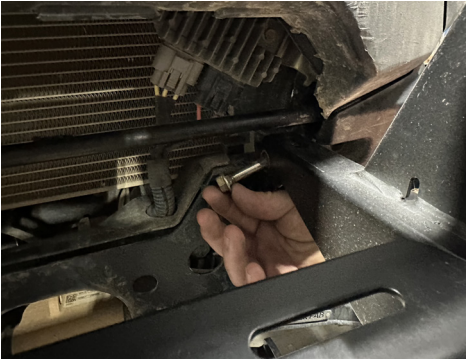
Use 15mm Socket and 15mm Wrench to remove OEM bumper mounting Hardware
